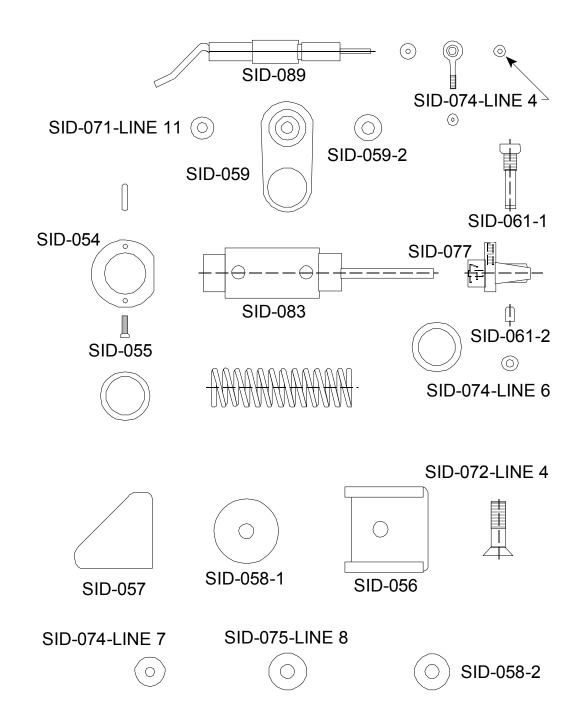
EXPLODED VIEW OF SHOCK ABSORBER MOUNTING ASSEMBLY
